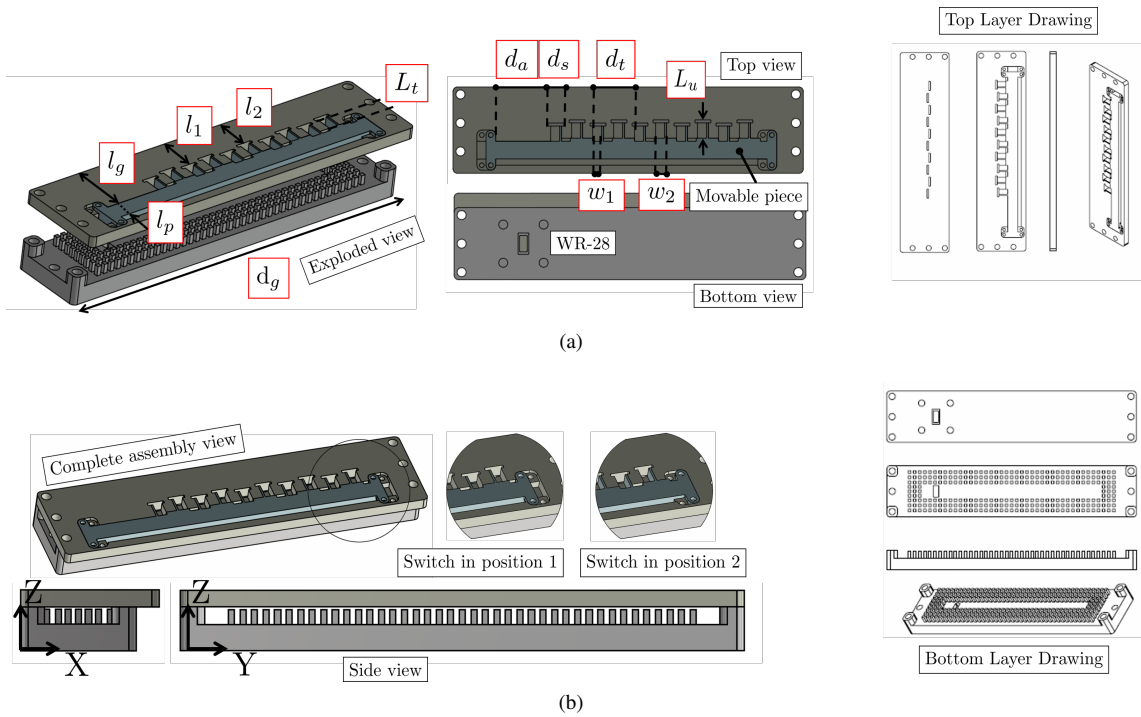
3D sketch of the 1×10 array antenna. (a) Left figure shows both lower and upper pieces of the antenna in an exploded view. The upper piece is composed of a fixed and a movable part, with different color for an easier identification. Top and bottom view are included in the right figure. (b) Complete assembled antenna (top and side views) with two zoomed figures showing the switching positions. Both figures include also top and bottom schematic drawings of the antenna.
